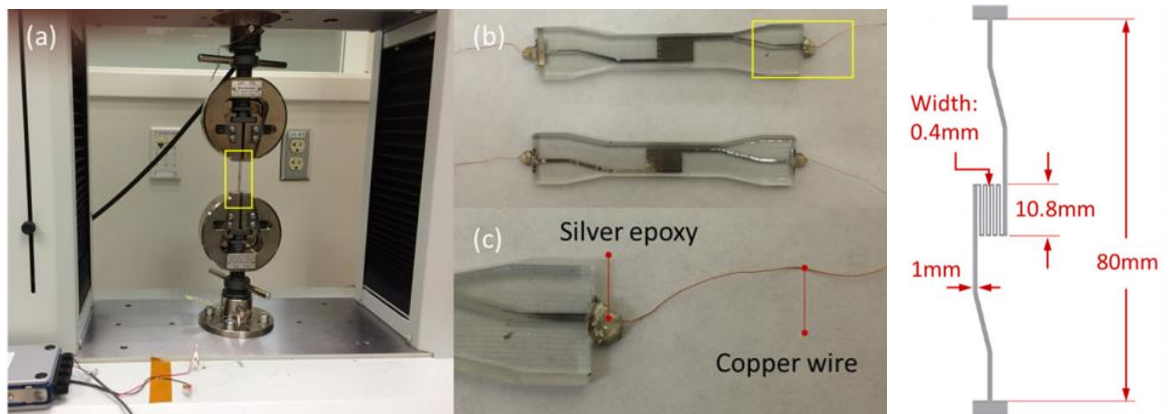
Testing of DW components integrated in a 3D printed part [8]
